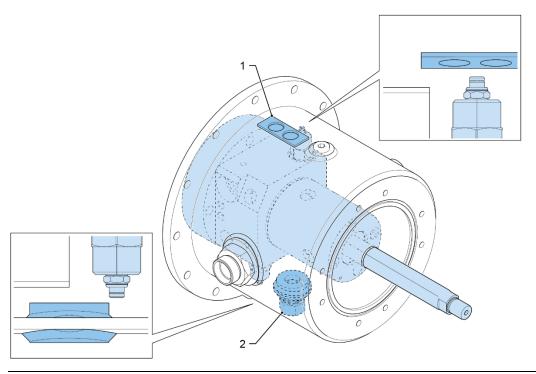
Possible contact points between the locking valves and the OD-box housing
